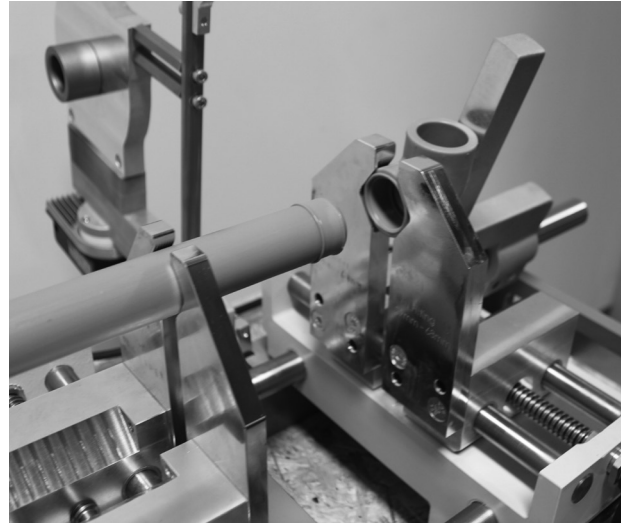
Move the machine slides with the handle lock and remove the heating element.
